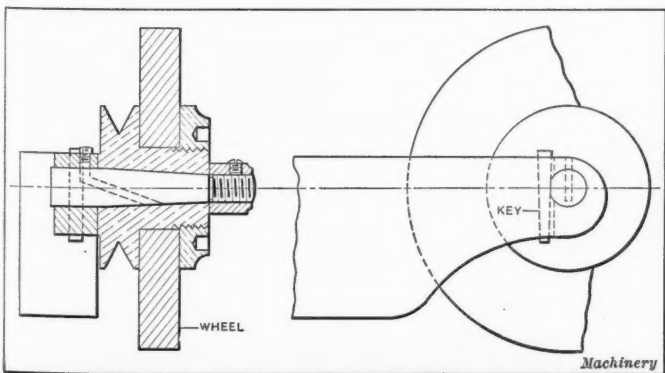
Design of the Wheel Support for the Toolpost Grinder
